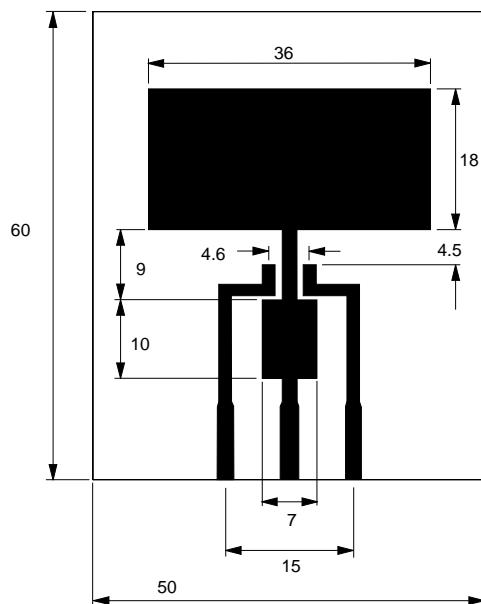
PCB for thermal resistance and power rating for SOT223.
